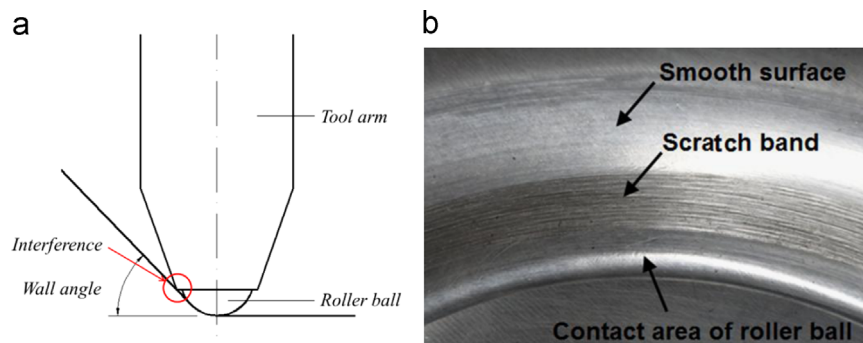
VRB tool and its shortcoming. (a) Geometry of VRB tool and (b) surface scratch by VRB tool.
